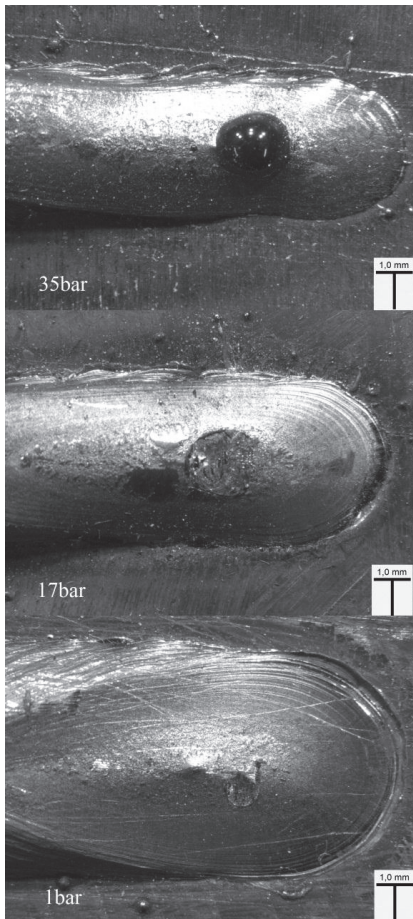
The end crater shape representing the weld pool size and style from top view
